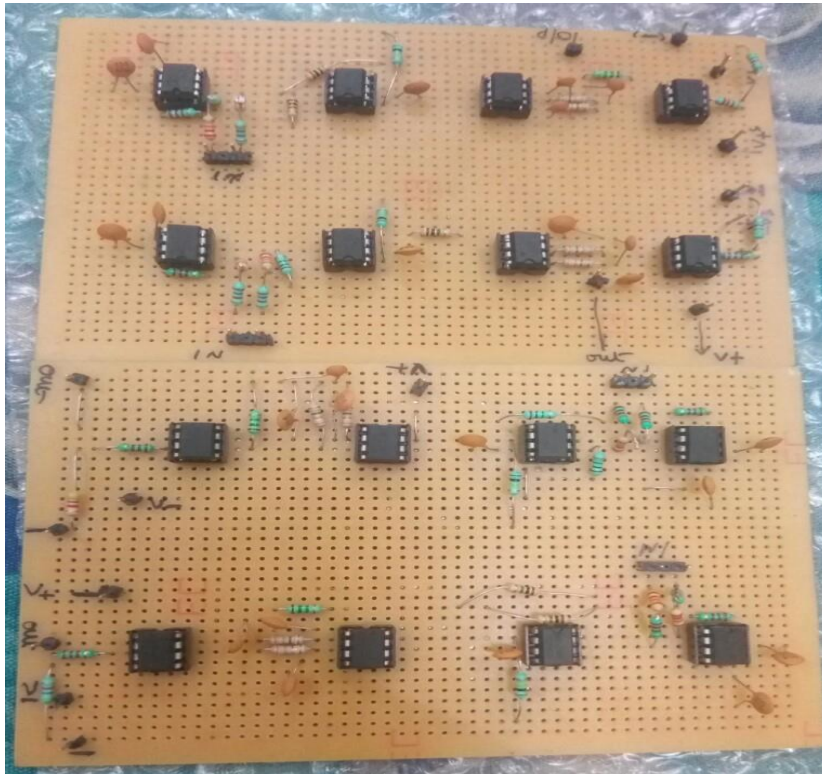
Assembled Circuit Board after the breadboard circuit check
